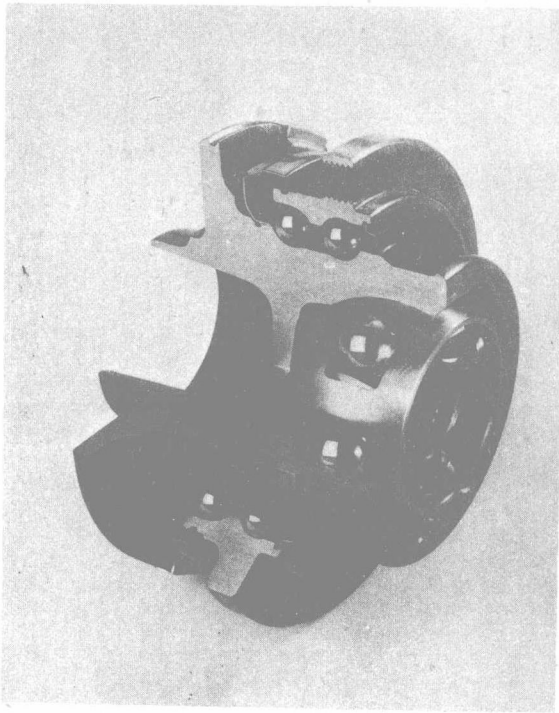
SKF Hub Unit 4 – bearing, hub and CV joint
